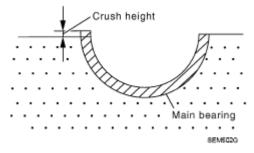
Identifying Crush Height Of Main Bearing Courtesy of NISSAN MOTOR CO., U.S.A.
